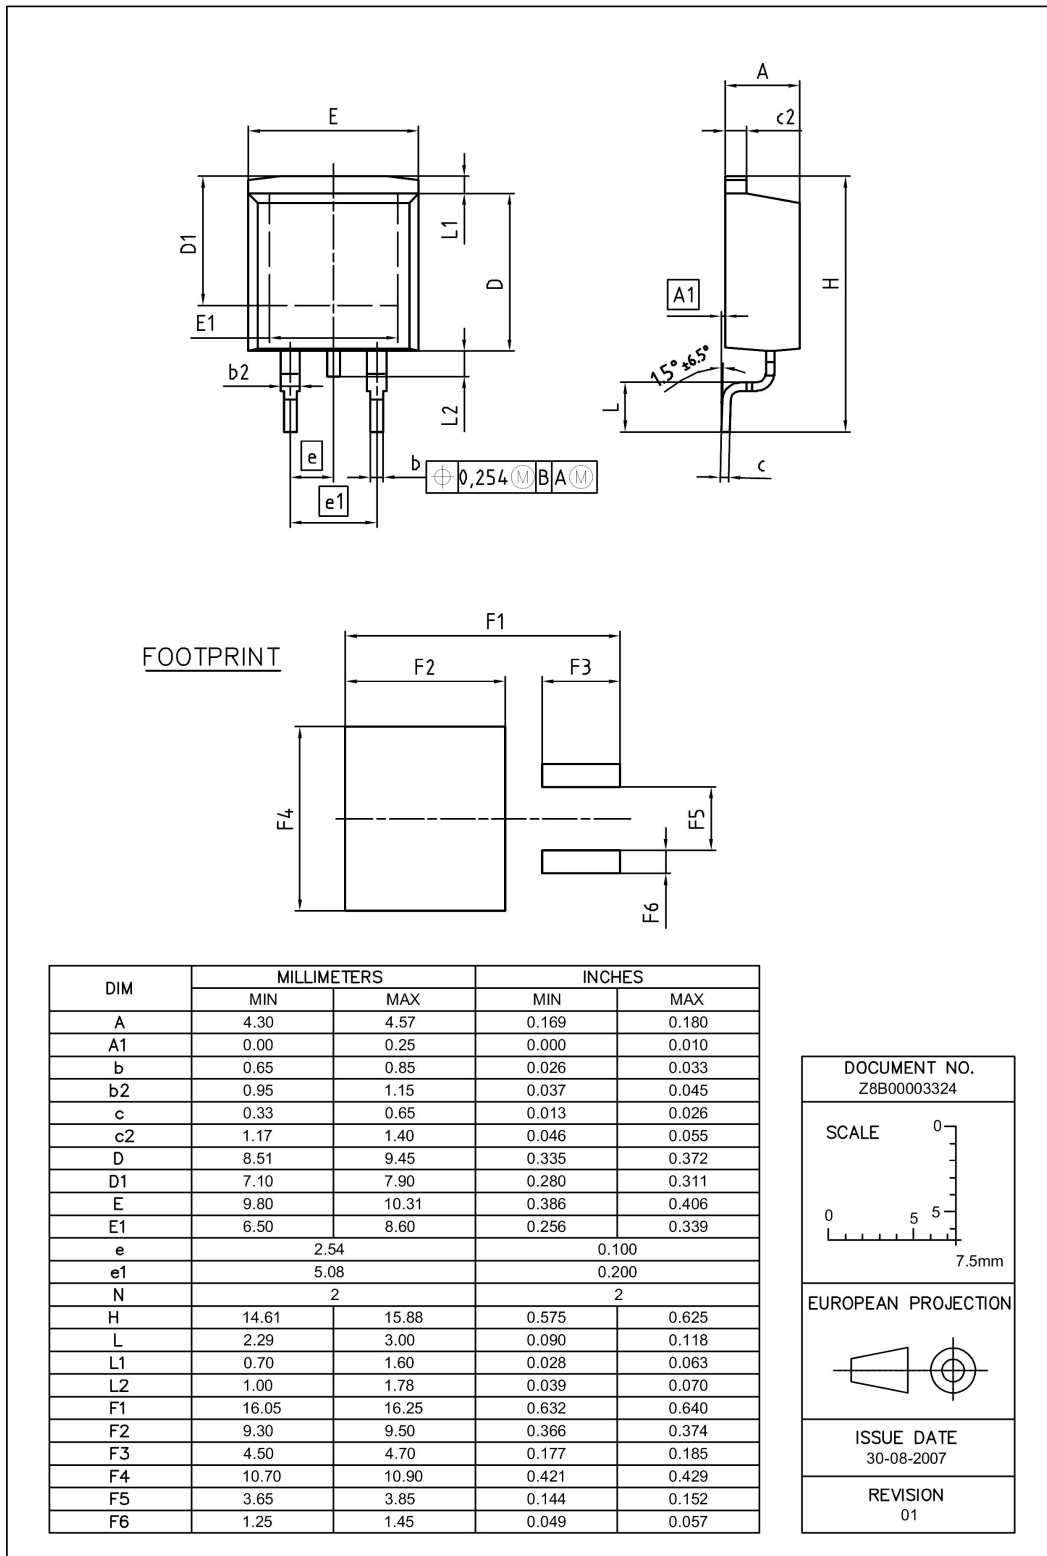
Outline PG-TO 263, dimensions in mm/inches
